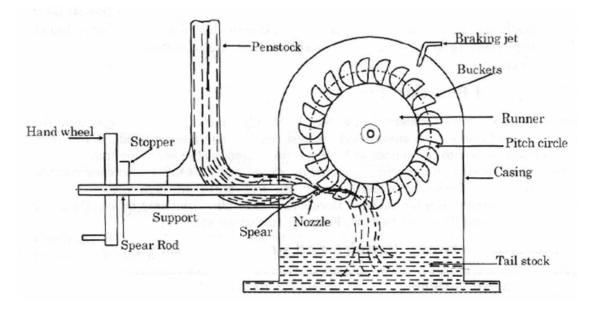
Layout of a Typical Single-Nozzle Pelton Turbine⁵
